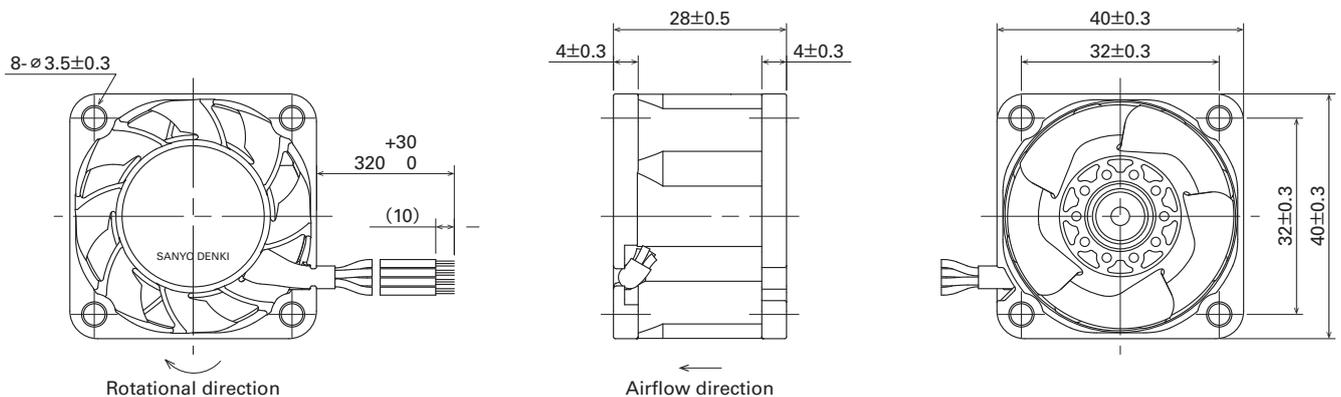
Dimensions of the *San Ace 40L 9LG* type (Unit: mm)
